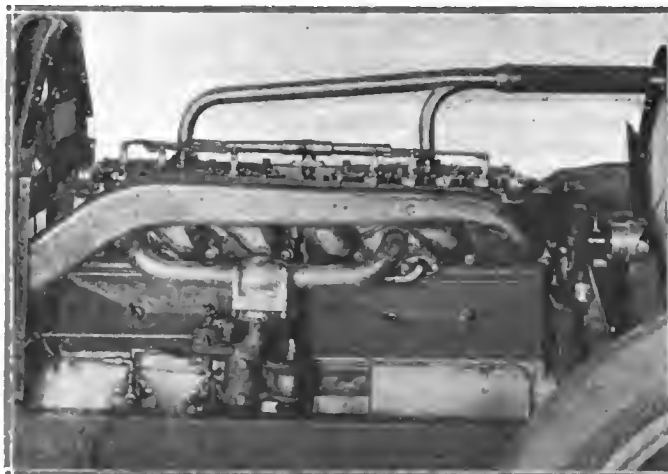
Right side of the Howard six motor, showing high mounting of carbureter, neat method of carrying wires over the top of the motor and novel form of exhaust manifold
